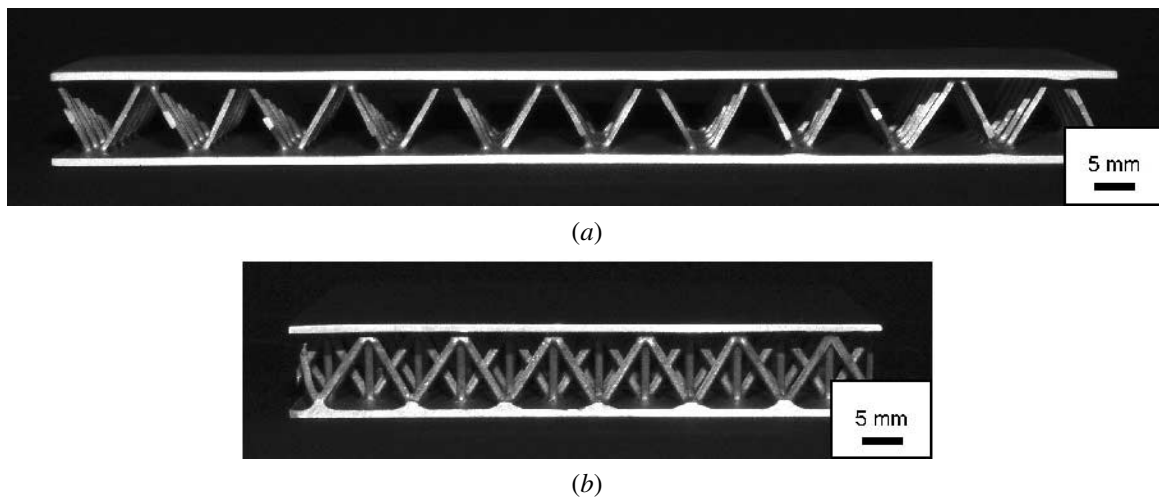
Aluminum alloy sandwich structure with a tetrahedral core: (a) side view and (b) end view.
